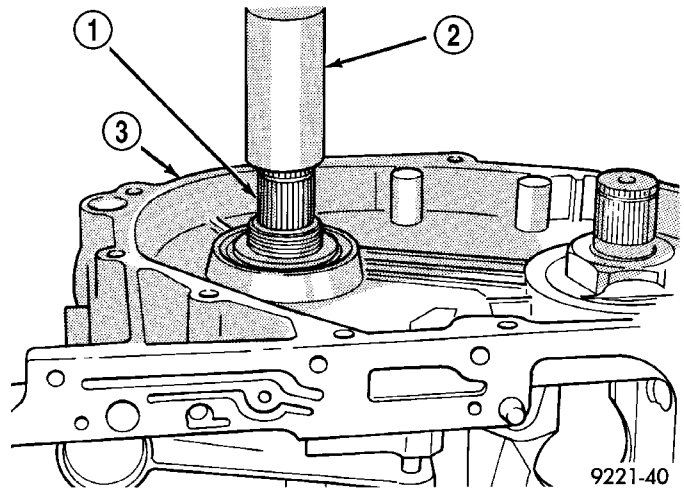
Use Arbor Press to Remove Output Shaft from Case
